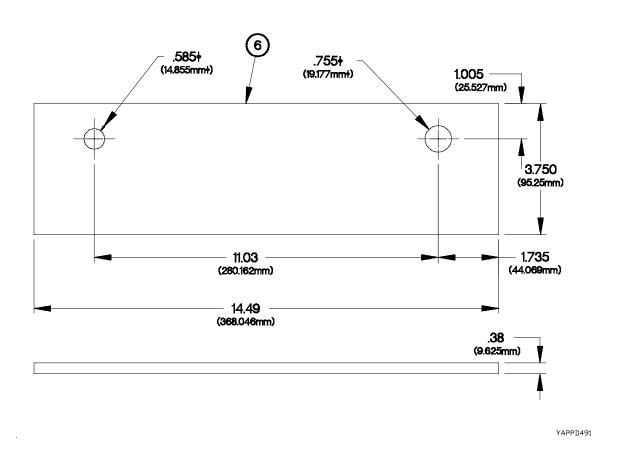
Transmission Lift and Mounting Bracket Bolt Mounting Plates
